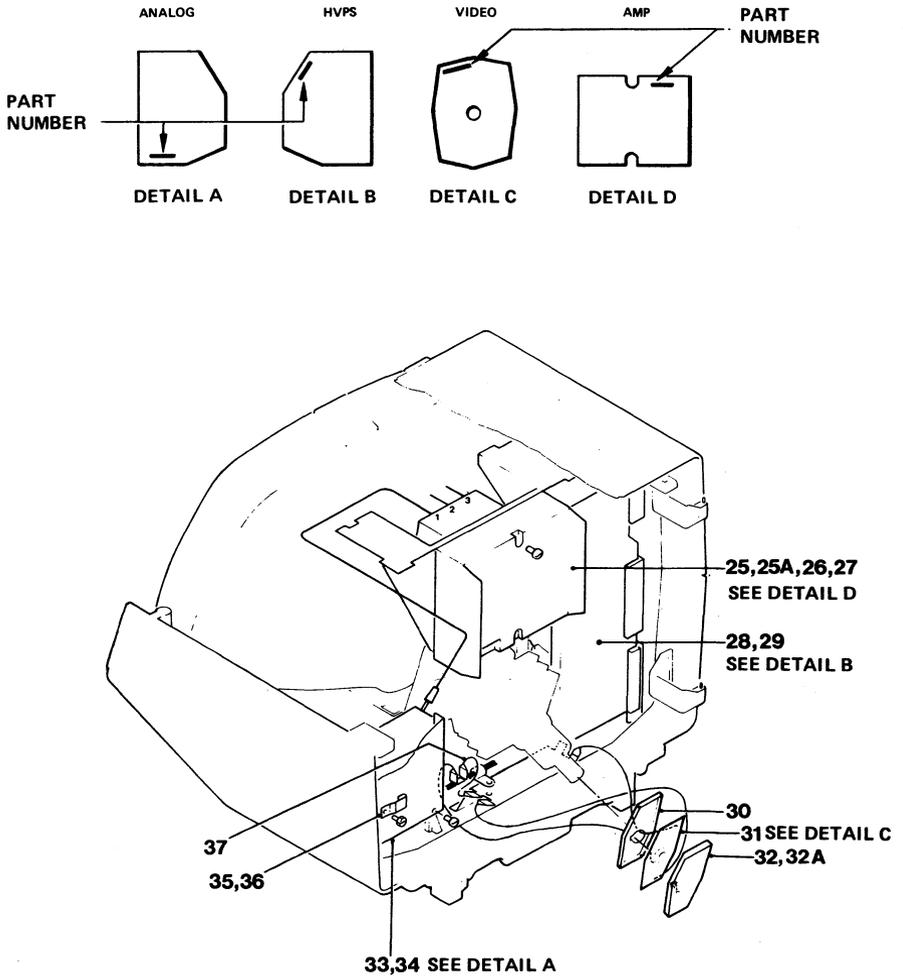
(Sheet 2 of 4). Front Enclosure Assembly
